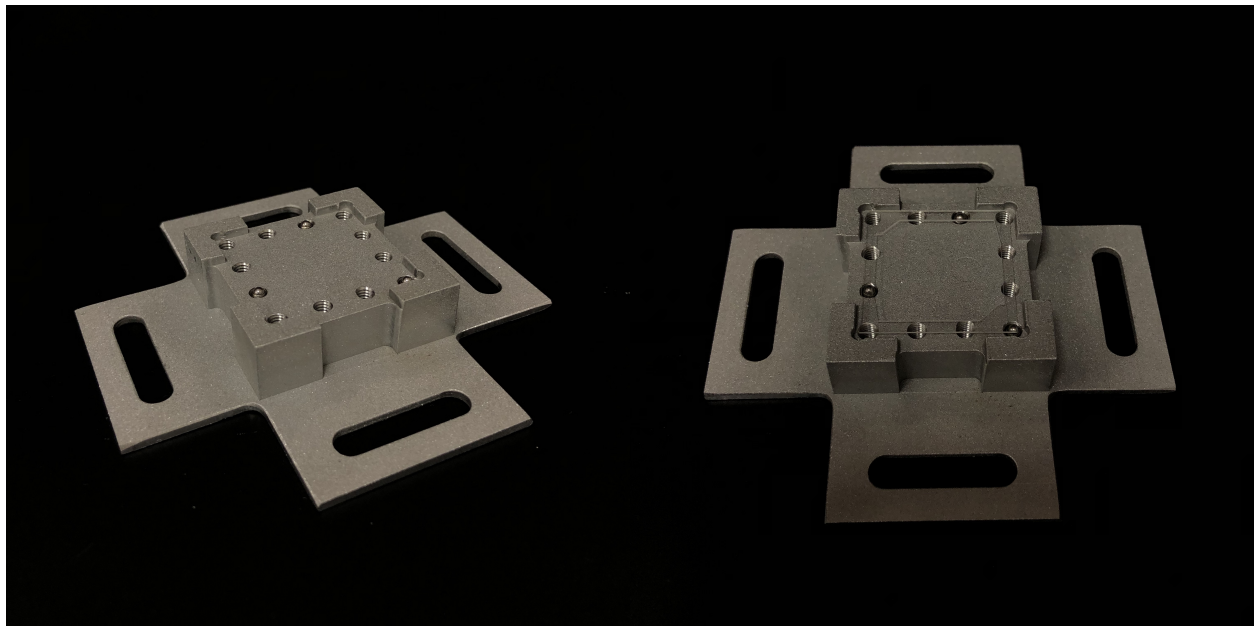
The fabricated aluminum mount for the pendulum resonator. The inner perimeter of the mount is lined with threaded holes so ball bearings can be placed. A sample resonator frame is shown sitting on top of them.
